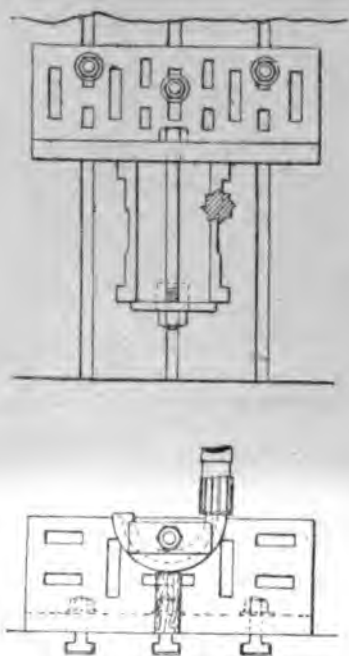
Brass held with Angle Plate, for milling Joint Face.
